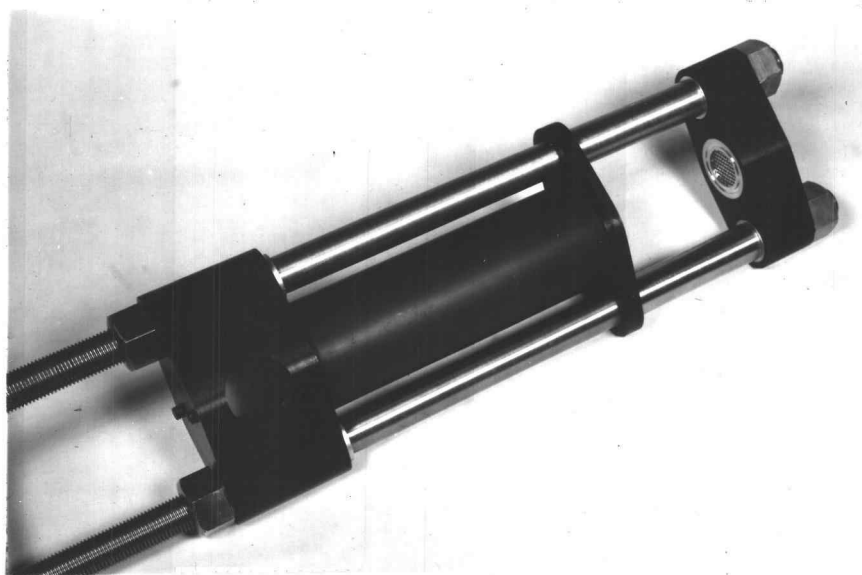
Photograph of rotating assembly shown in cross section in Figure 7. Bed retainer is not in place in this picture.
